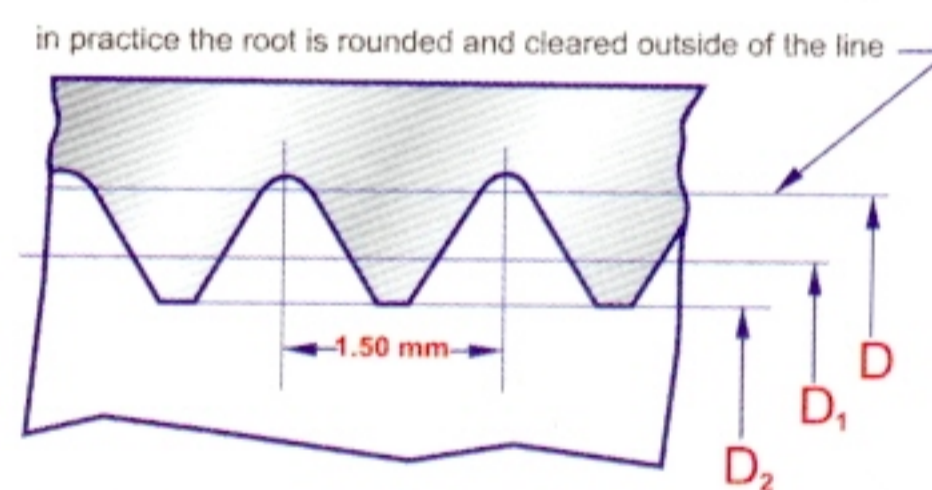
Diameter Dimensions of BS 4568 screw threads
